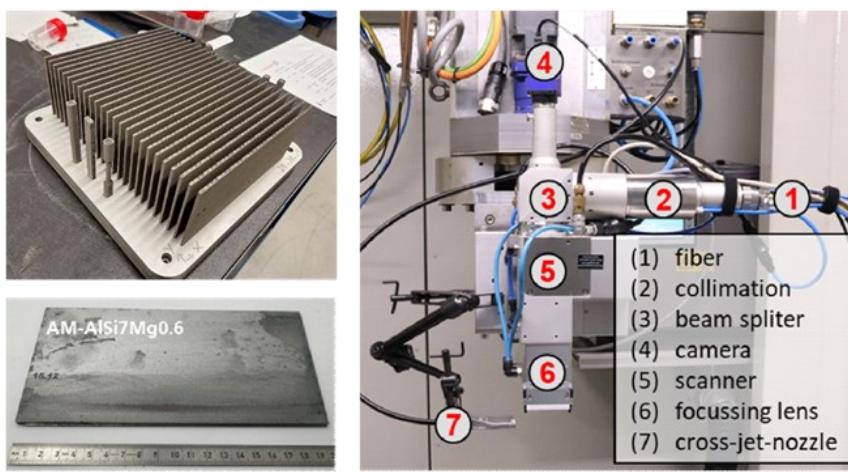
left top: example of printed sheet material; left down: separated printed plate from AlSi7Mg0.6 and right: experimental set-up for laser beam welding
